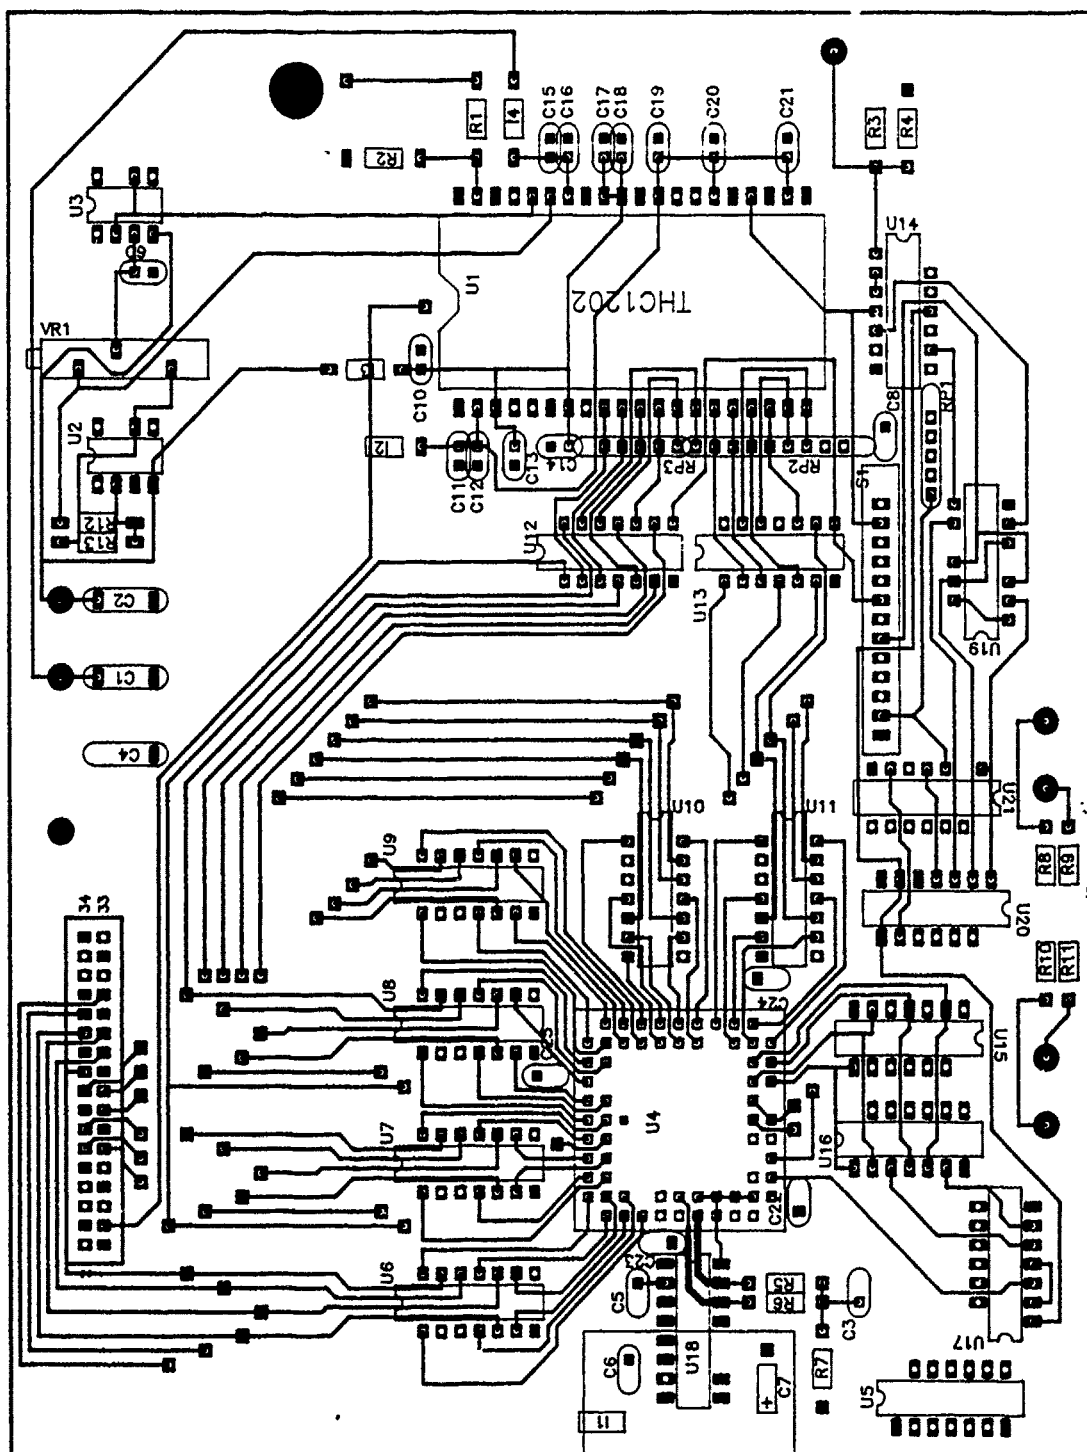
ITL Transmitter Board - PC Board Layout (BOTTOM)
